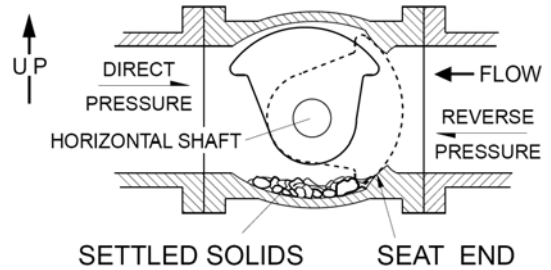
HORIZONTAL PIPE WITH SOLIDS
